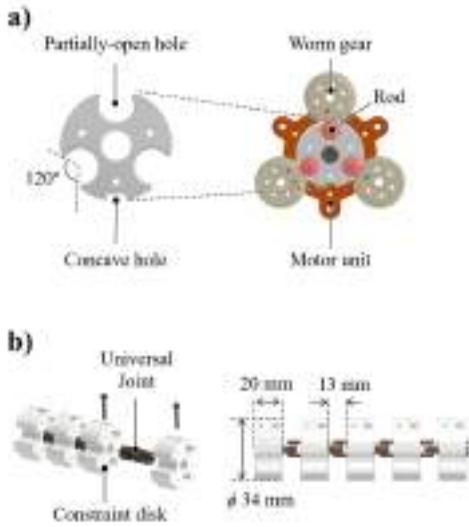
(a) Front view of a single constraining disk and its insertion into the motor unit. (b) Chain of disks connected by universal joints to maintain a constant disk distance
